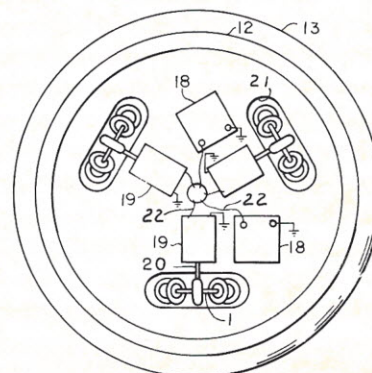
A bottom view of the bumper car with the drive motors, battery, and controls shown schematically.
